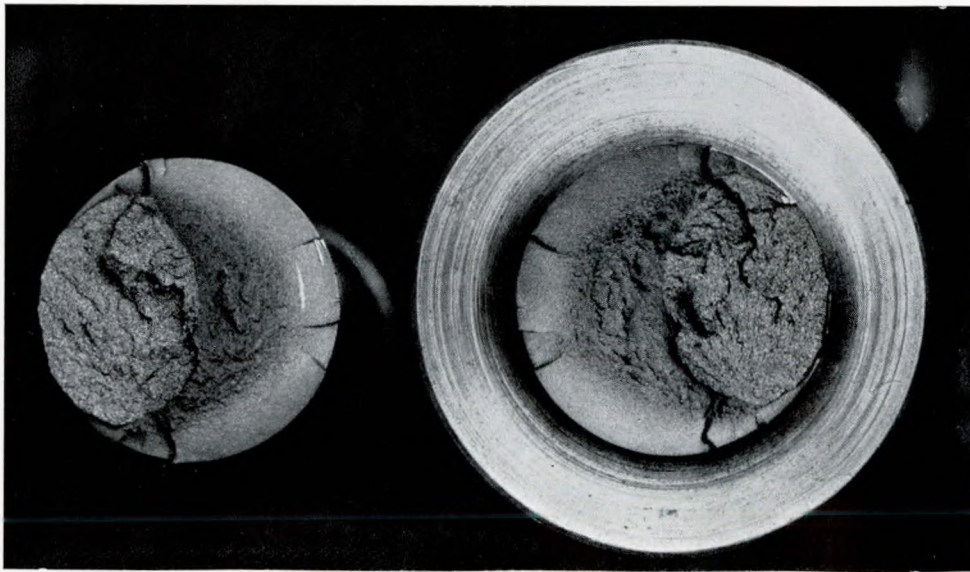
Example of fatigue fracture at fillet under head of bolt (failure after 79,000 cycles, 3.0 to 15.0 tons per sq. in.)
